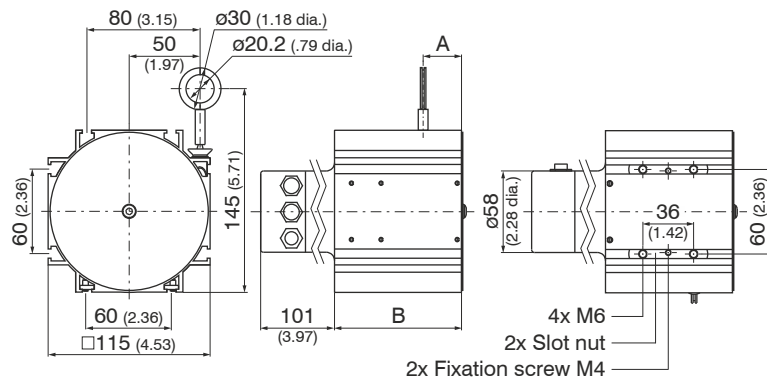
Dimensional drawing ... - FD115 - CO/PB, dimensions in mm (inches), not to scale
